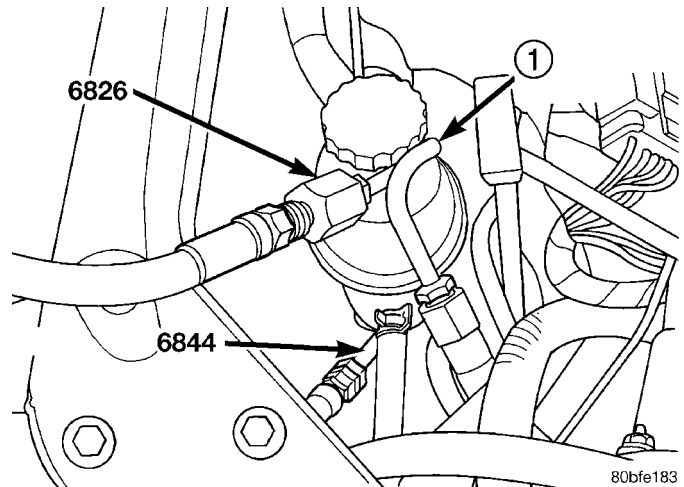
Analyzer Connected To Power Steering Pump (2.7L Engine)
